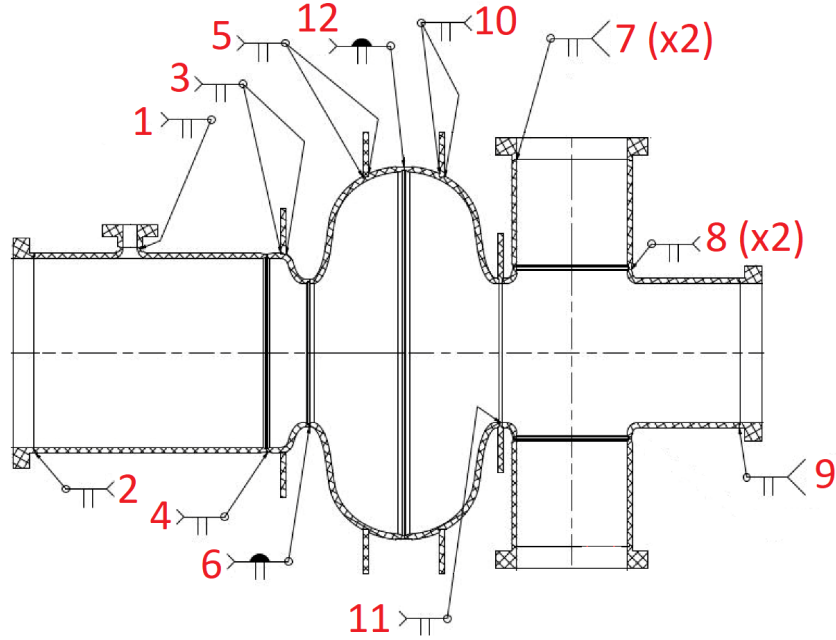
Designed sequence of electron-beam welding for LCC1-1.
